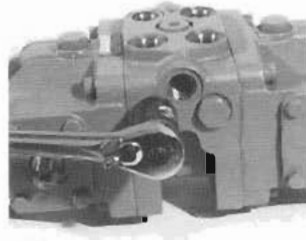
Remove Check and Relief Valve Plug (PT)
